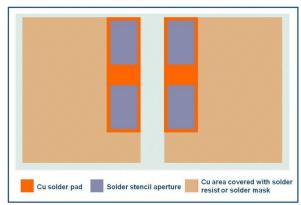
Solder mask defined (SMD) / Half SMD pad design
